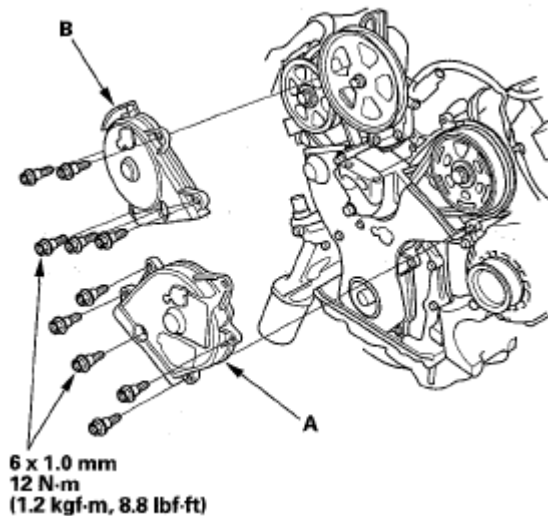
Identifying Front Upper Cover And Rear Upper Cover Bolts With Torque Specifications
